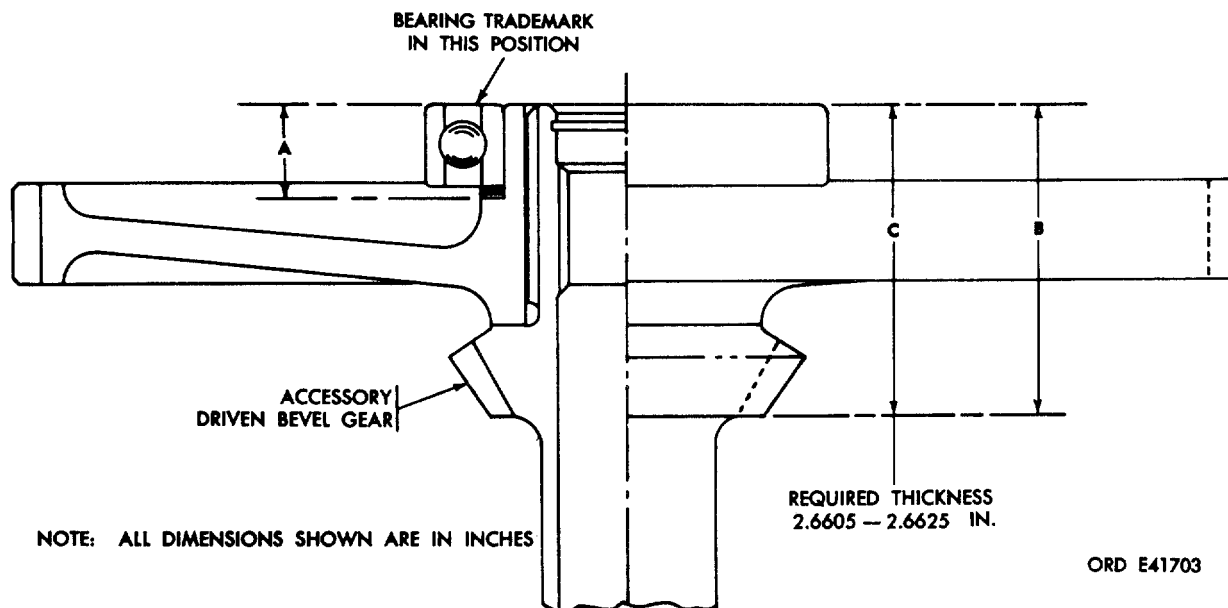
Determining shim thickness for rear fan driven gearshaft and rear fan drive bevel gearshaft.
